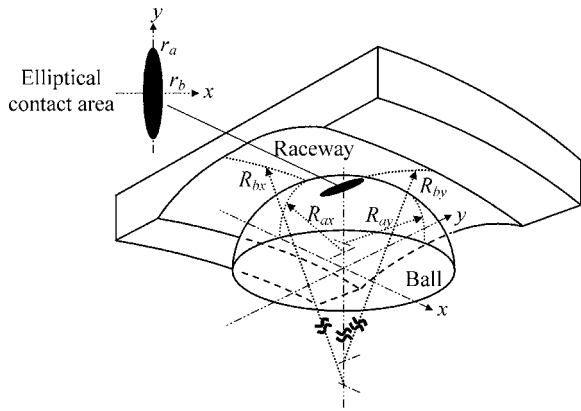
Geometry of a ball bearing outer raceway and ball in contact.
